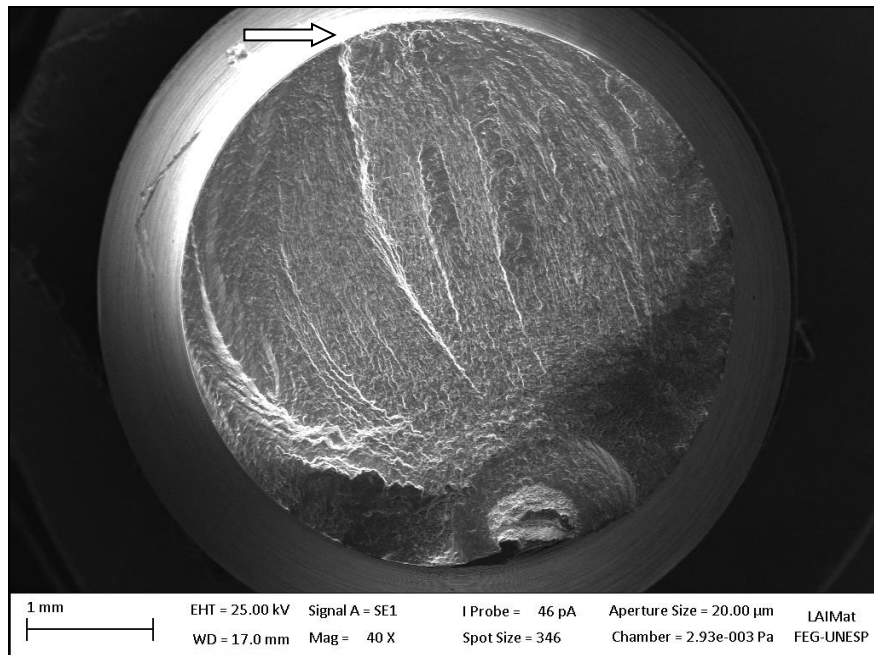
Fractography of the AA 6351 alloy tested at 173 MPa and fractured after 3,405.900 loading cycles.
